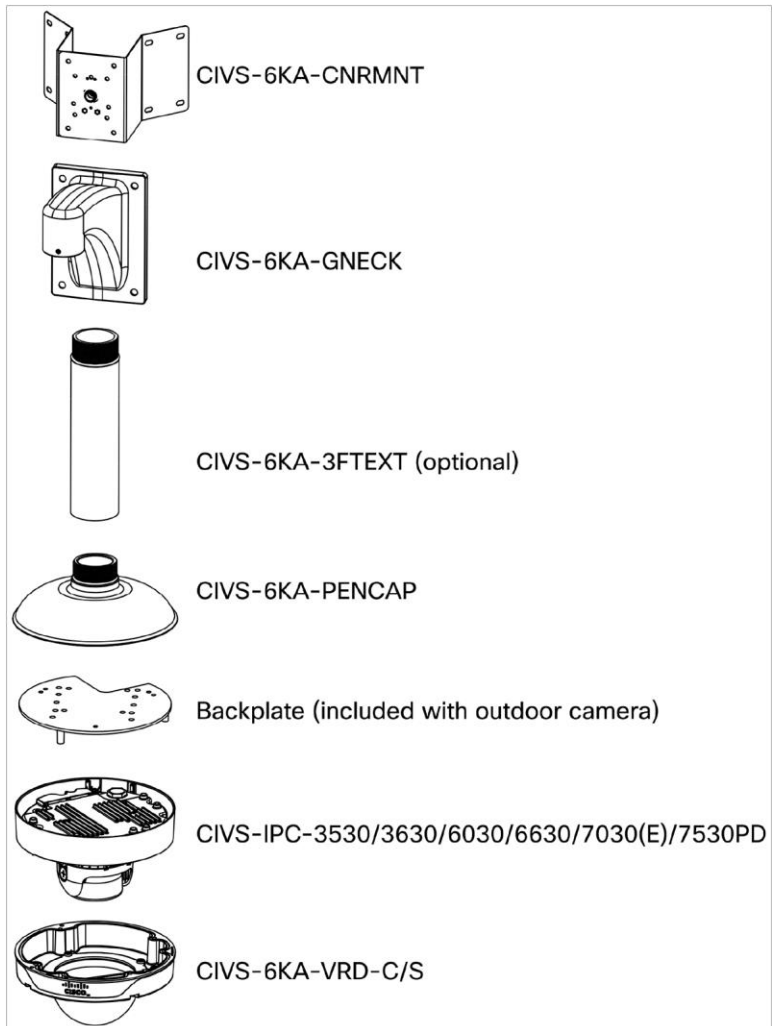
Corner Mounting of Outdoor Pan, Tilt, Zoom (PTZ) Camera
